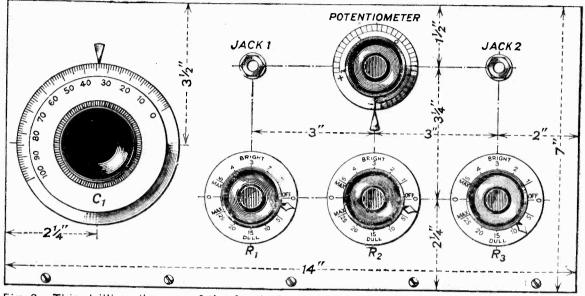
This drilling diagram of the front of the panel shows how few holes are required. A full size blueprint may be obtained at 1/6 post free. No. 141a.
